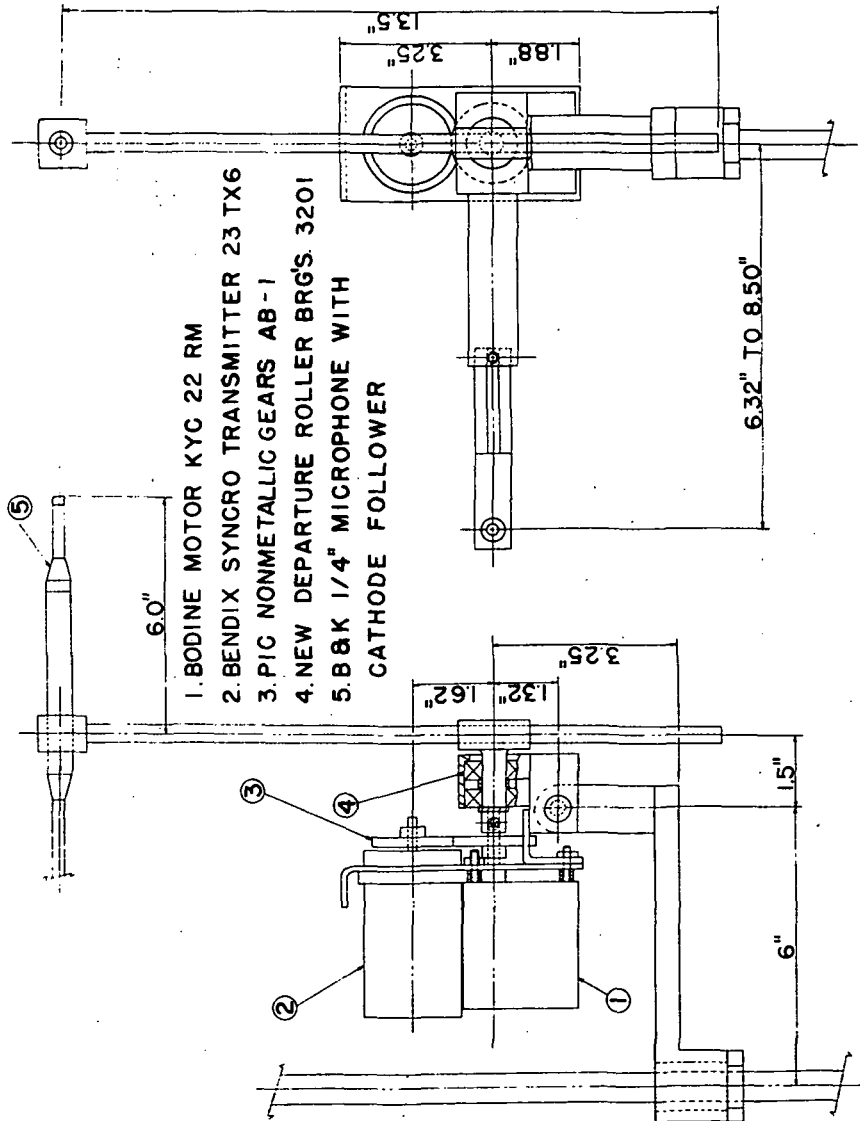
Assembly Drawing of 1/4" Microphone Sound Processing System
